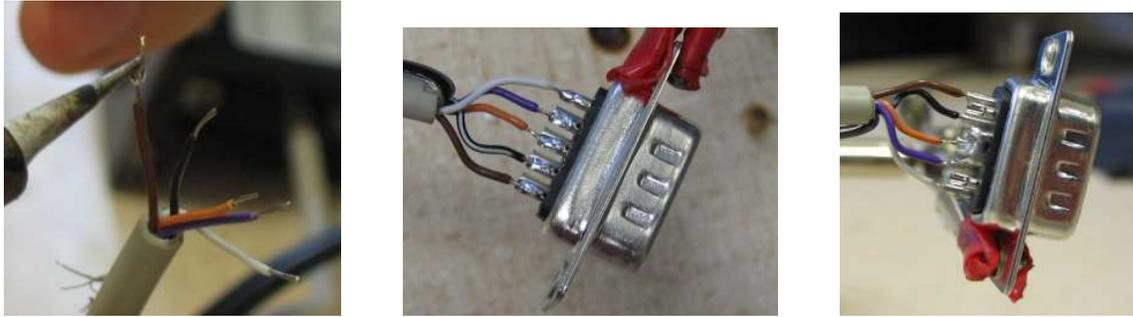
(Left) Tinning the brown wire in our example cable. (Center) Pins 1–5 soldered to the corresponding wires. (Right) Pins 7–8 jumpered for loopback.
